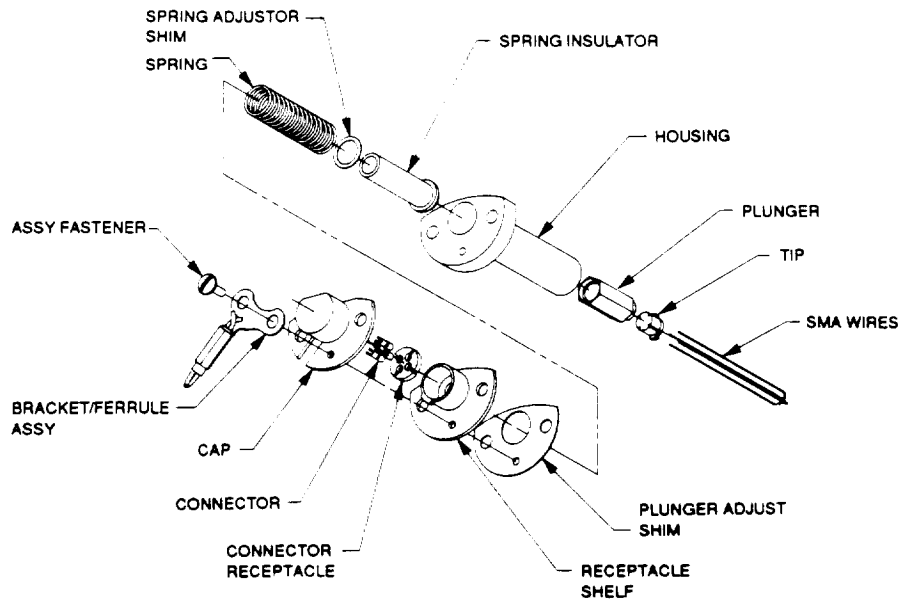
Exploded-View Isometric of the Fail-Safe Actuator
